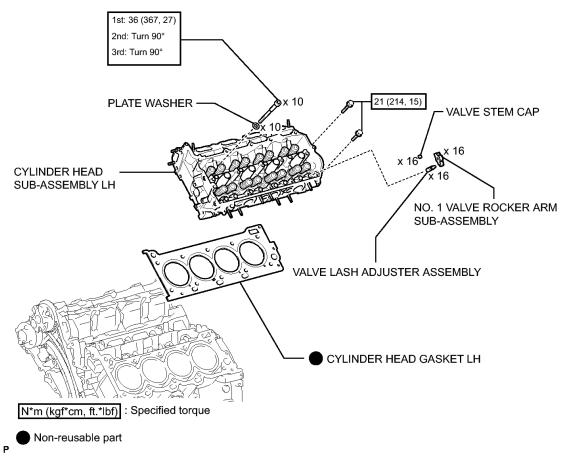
Identifying Cylinder Head Gasket (For Bank 1) Replacement Components With Torque Specifications
